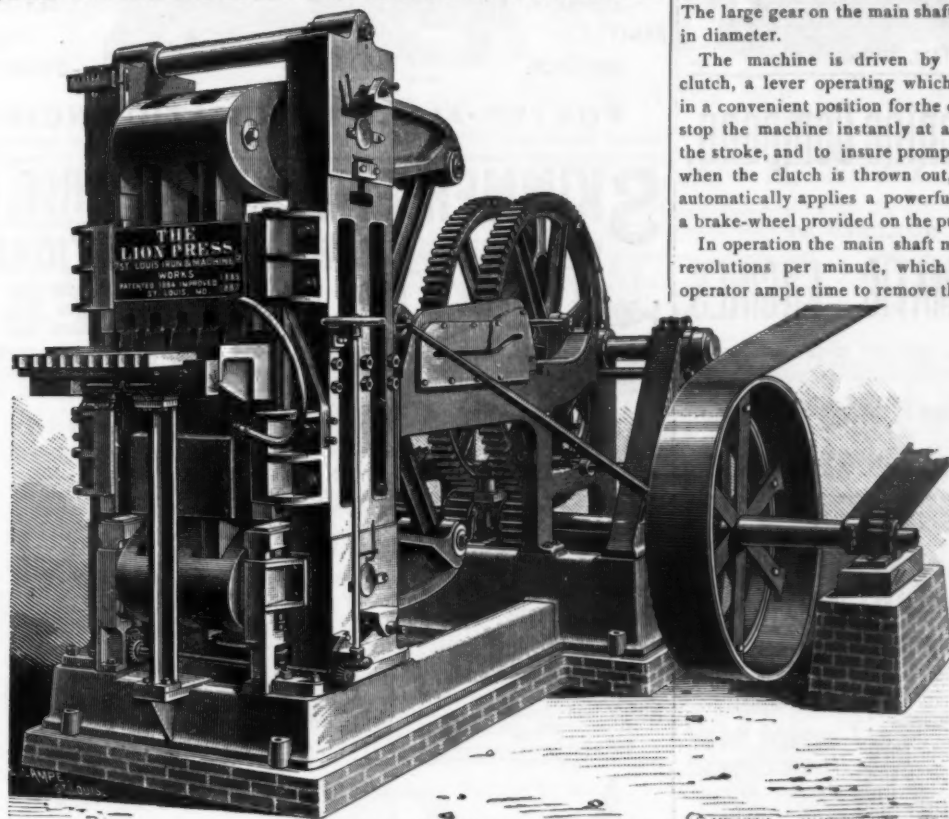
THE LION DRY CLAY BRICK MACHINE.
